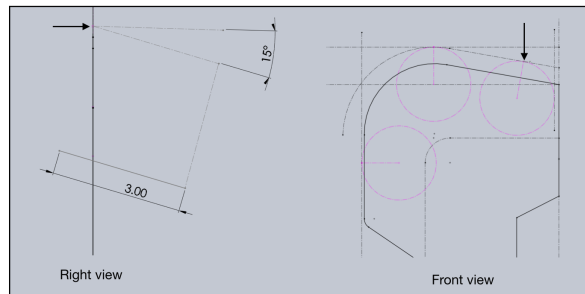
Cutter back rake angle. Dimensions in mm.
